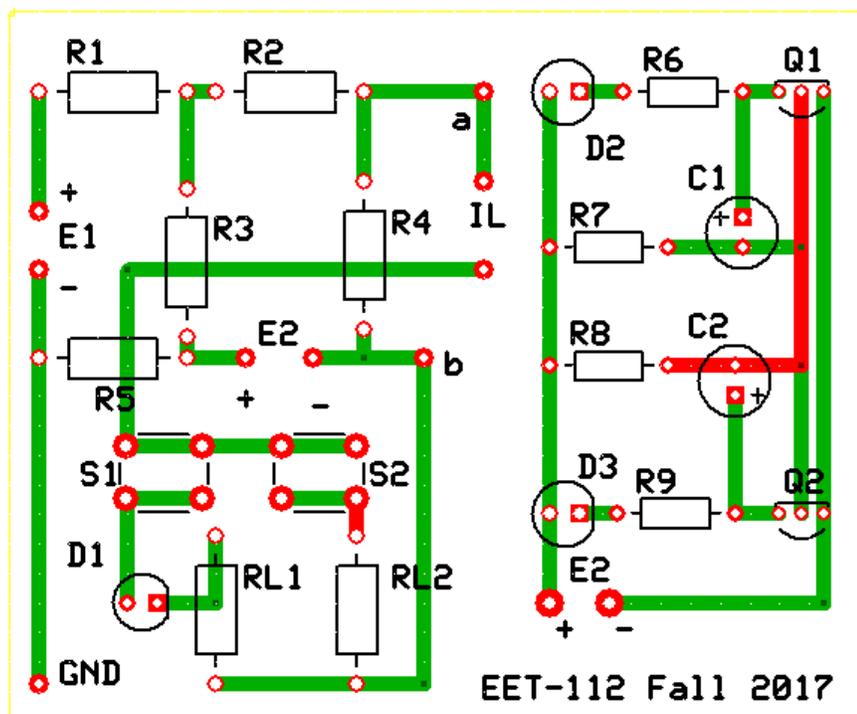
Flasher Circuit PCB (right-hand side of prefabricated PCB)
